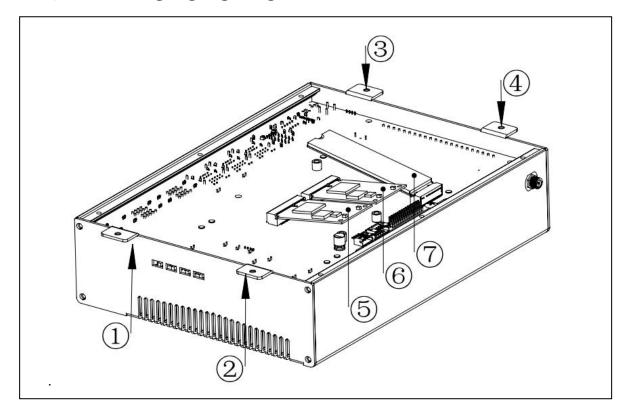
TPC6000-XXX4 miniPCIE expension card installation
